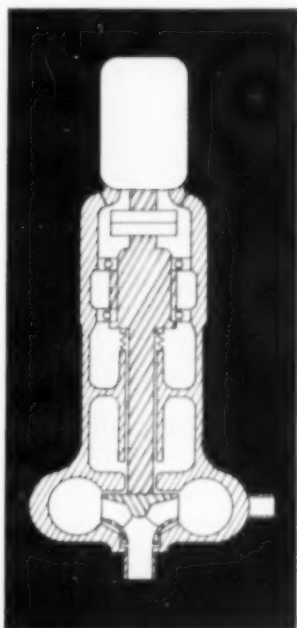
Liquid-metal pump and drive, vertical overhung shaft, inert gas blanket, motor drive.
